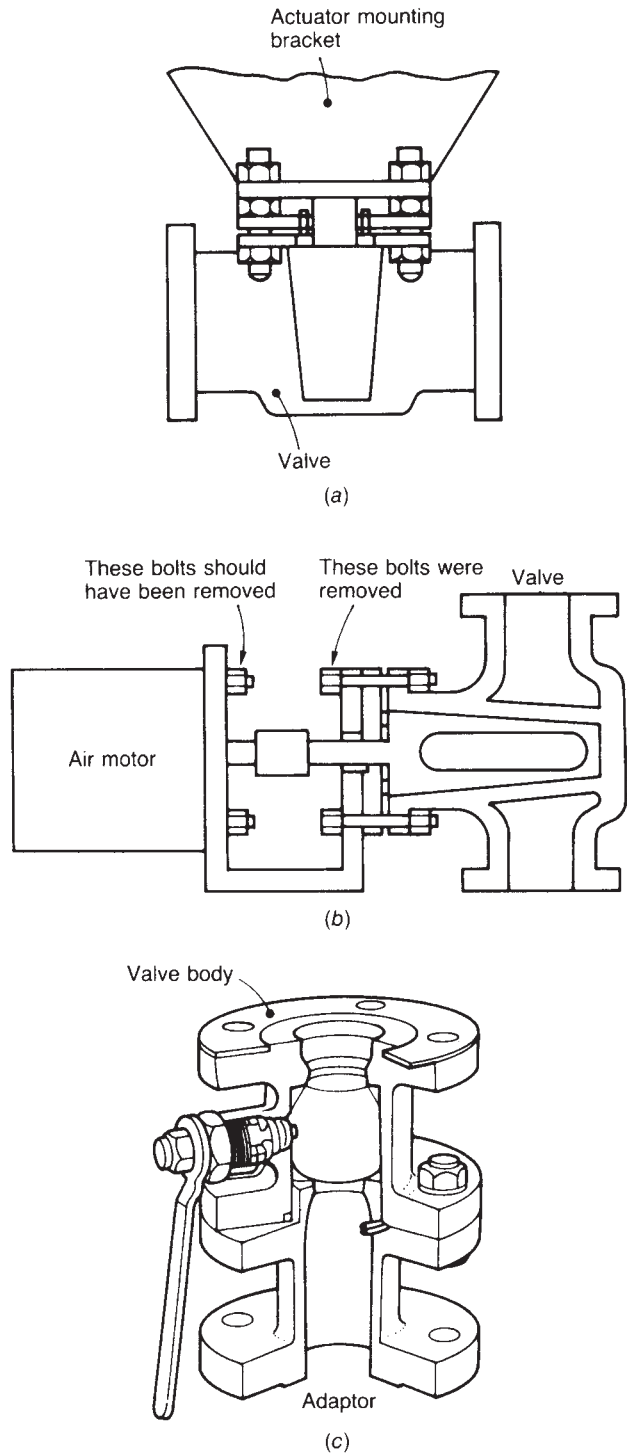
Some valve types involved in joint breaking incidents (Kletz, 1984): (a) valve and actuator, held by same bolts; (b) valve and actuator, held by separate bolts; (c) valve with adaptor – an integral part of valve (Courtesy of the Institution of Chemical Engineers)
